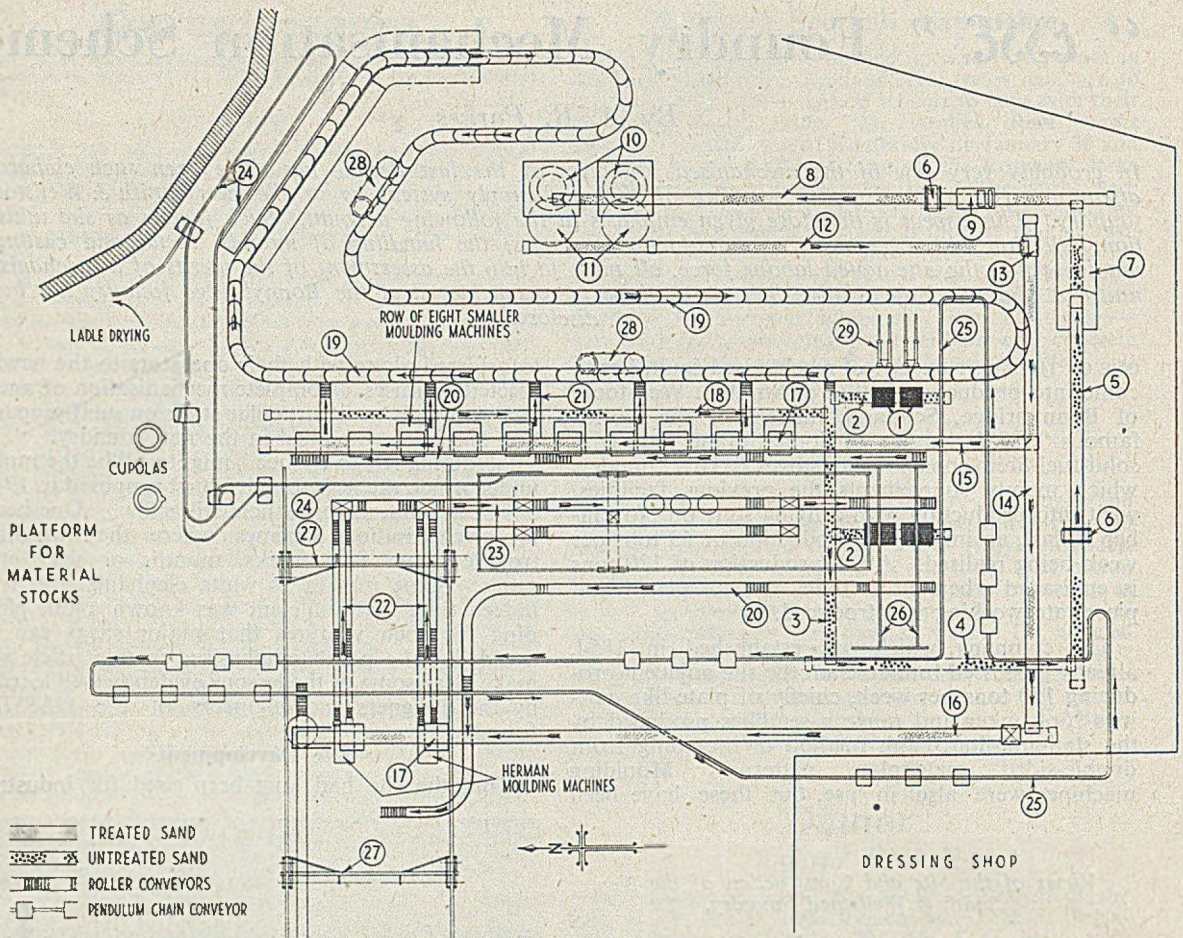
Plan of the New Smith & Wellstood Foundry.
